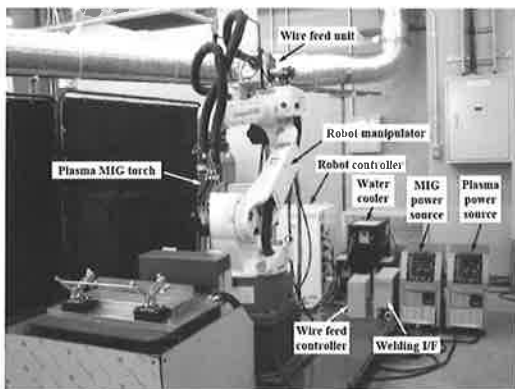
General appearance of plasma MIG welding robot system
